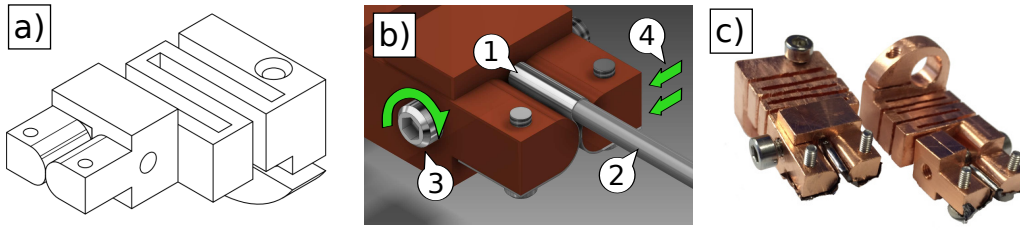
Final version of the SSE clamps. a) Schematic drawing b) Enlarged schematic showing how a strip of Ta foil (1) is used to hold the sample (2) in the clamp. The Ta foil is pressed against the Cu clamps by steel screws. A third screw (3) pushes together the two halves of the Cu clamp (4). c) Constructed clamps.
